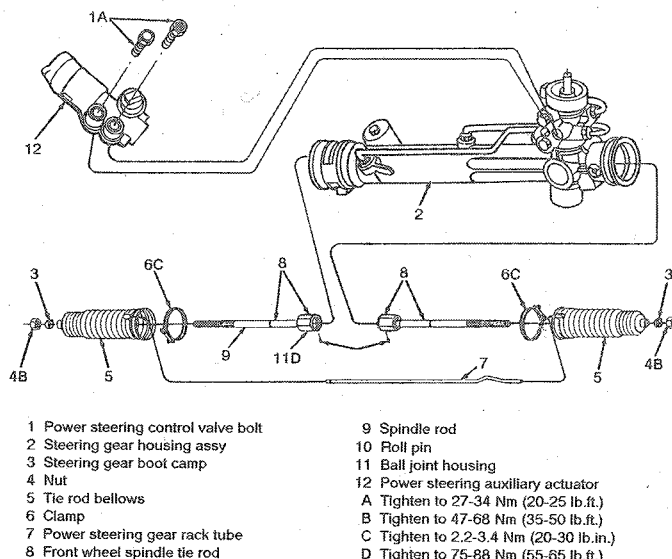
Exploded view of the Variable Assist Power Steering (VAPS) system
